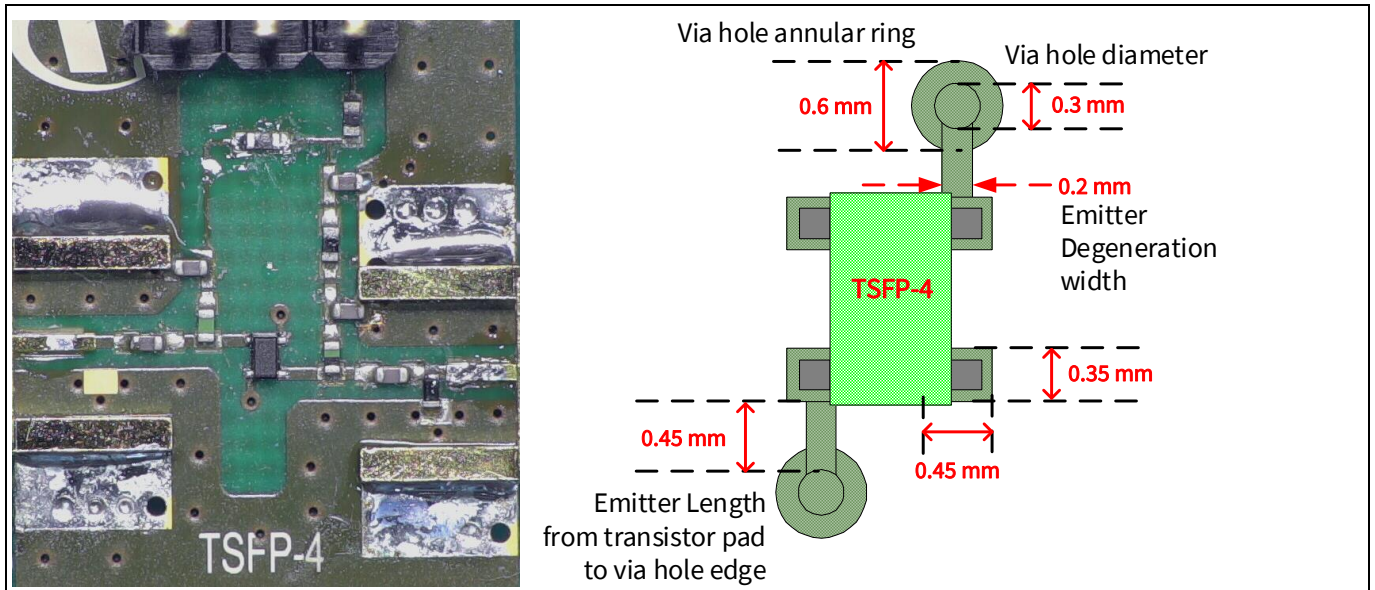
Photo of the evaluation board with PCB marking M11118 (left) and emitter degeneration details (right)
